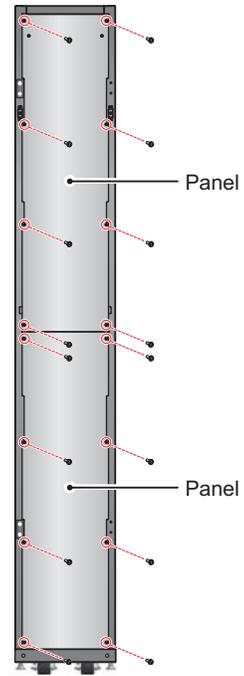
Remove the Cable Entry Lid_ Front Side)
